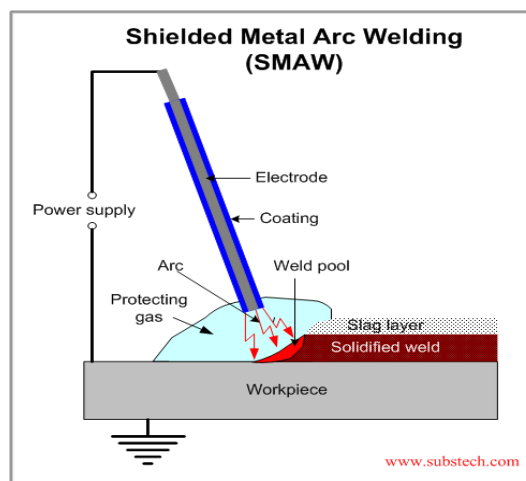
Illustration of shielded metal arc welding (SMAW)
